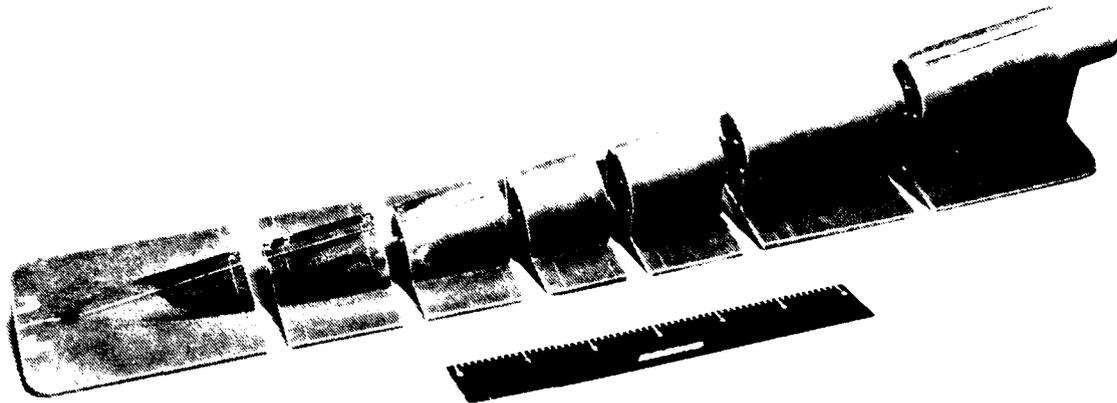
Photograph of the sectioned discharge fitting.
